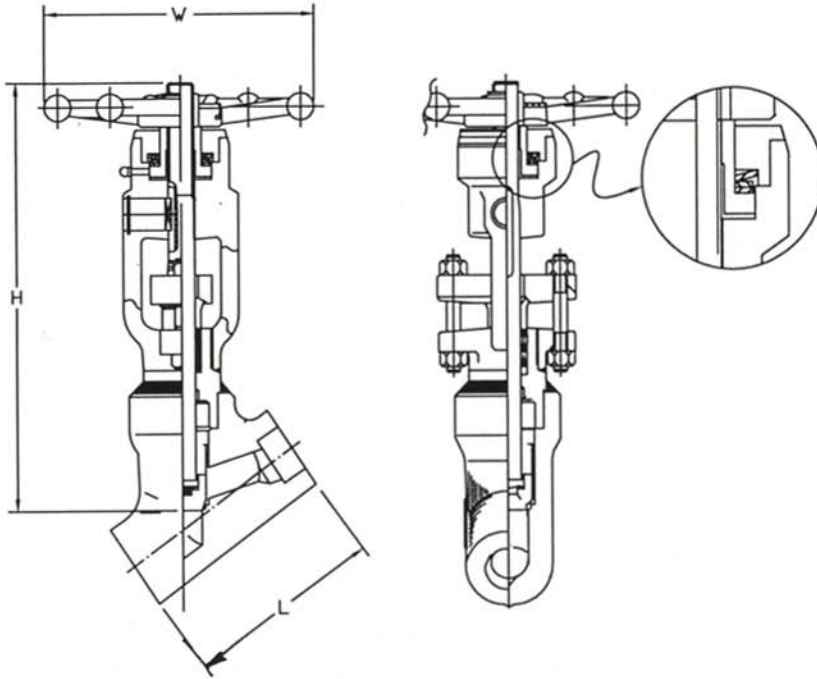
S-F913-WB-Y Class 1500 (Socket Weld)
